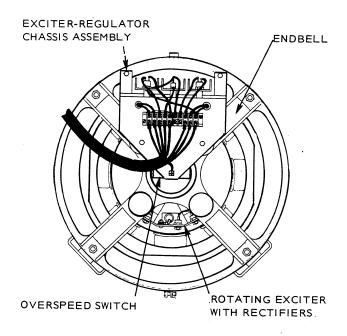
GENERATOR END VIEW (FRONT GRILLE REMOVED)
